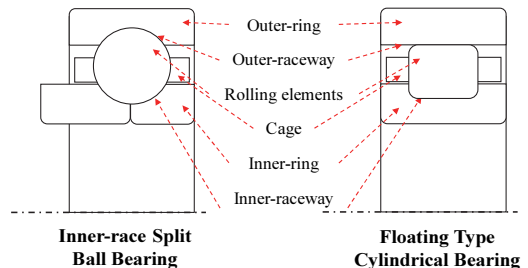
Components of bearings (left: inner-race split ball bearing, right: floating type cylindrical bearing).
